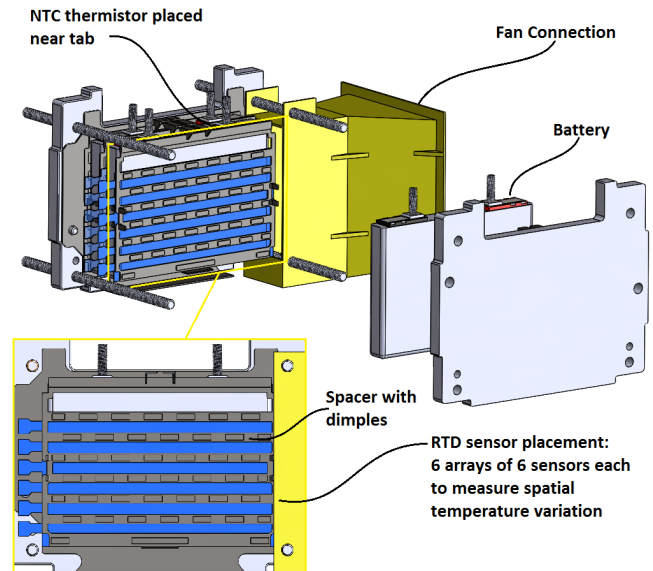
EXPLODED VIEW OF FIXTURE USED IN EXPERIMENTS
